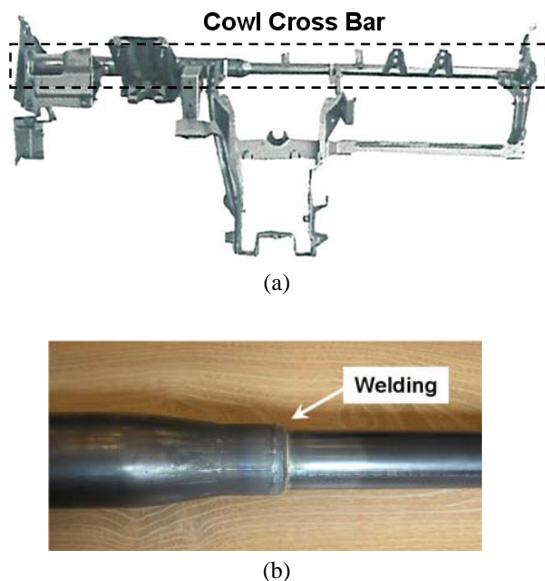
An example of the currently manufactured product: (a) a cowl cross bar assembly and (b) the welding region
